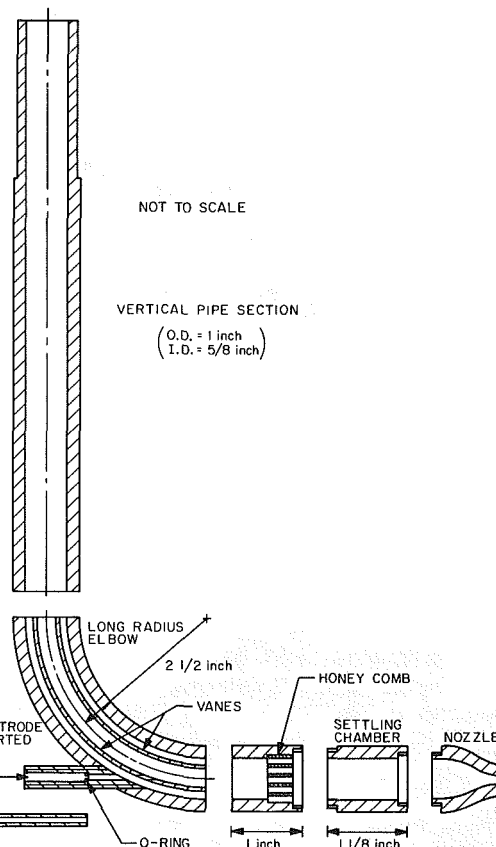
Diagram showing the geometrical details of the nozzle assembly
